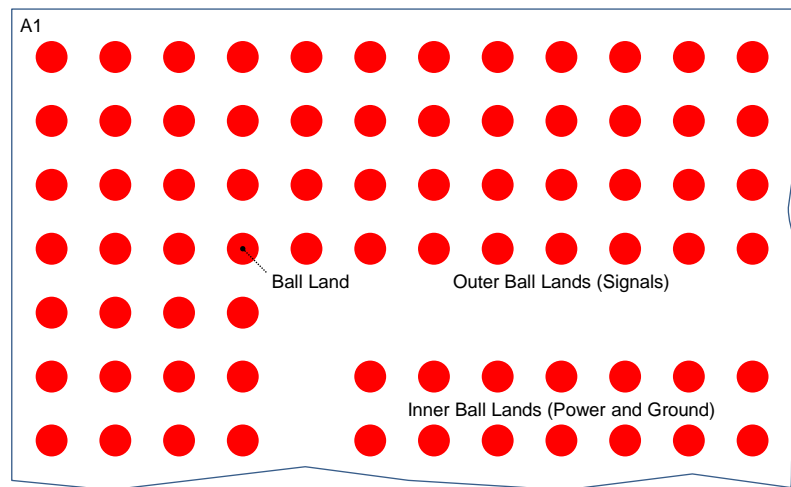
Upper-Left Corner of a 0.8-mm BGA Package Footprint
